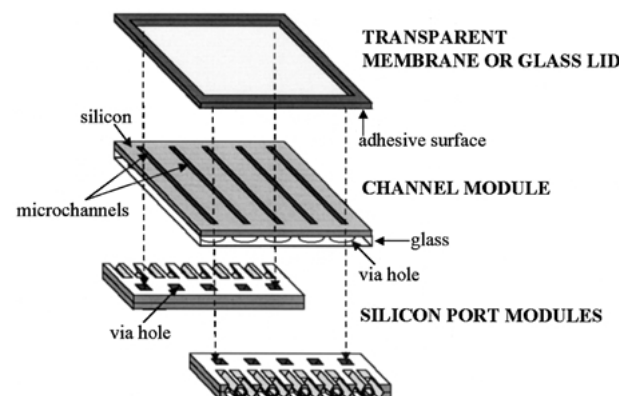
Exploded view diagram of the microfabricated fluidic platform assembly, illustrating individual components.
